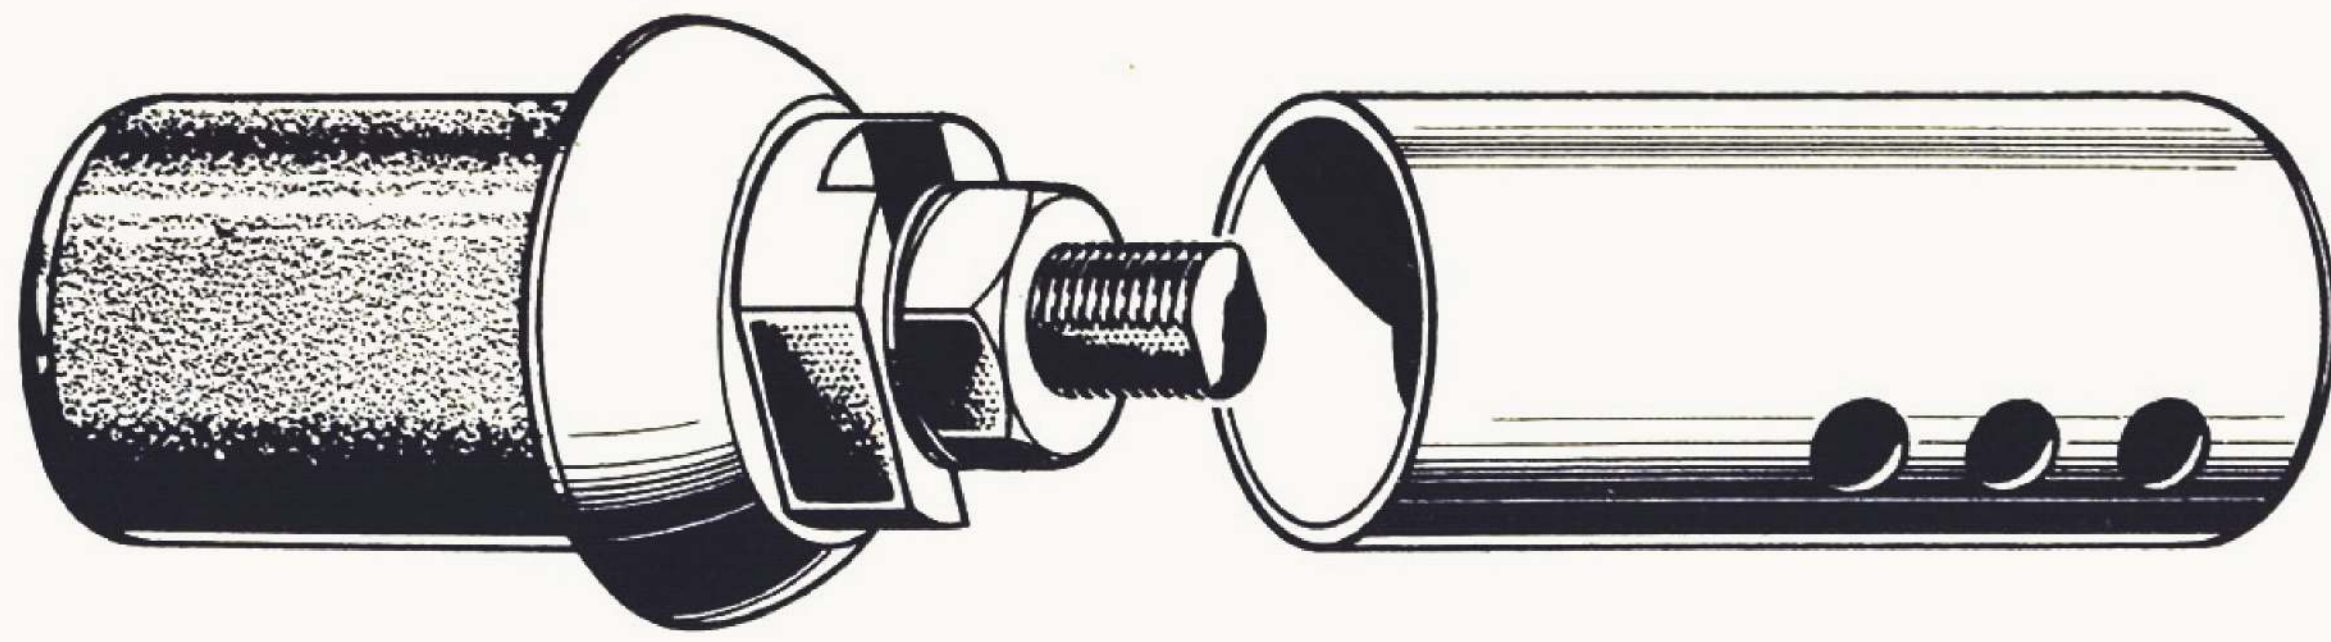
GUIDE FOR SUCTION AND PRESSURE RELIEF VALVE CONNECTION
